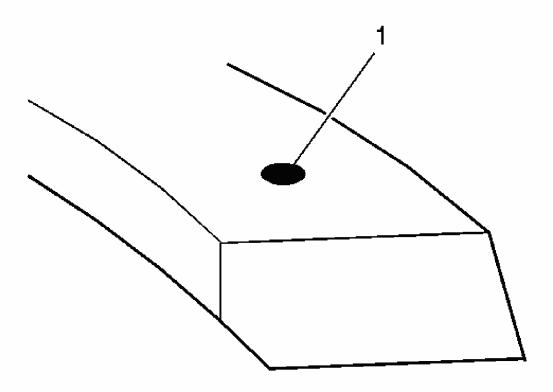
View Of Lower Compression Piston Ring Mark Courtesy of GENERAL MOTORS CORP.
